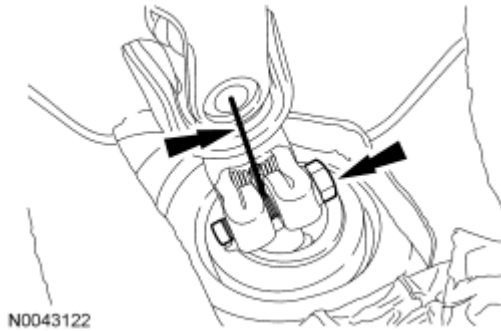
Locating Steering Column Shaft Index Mark And Bolt
